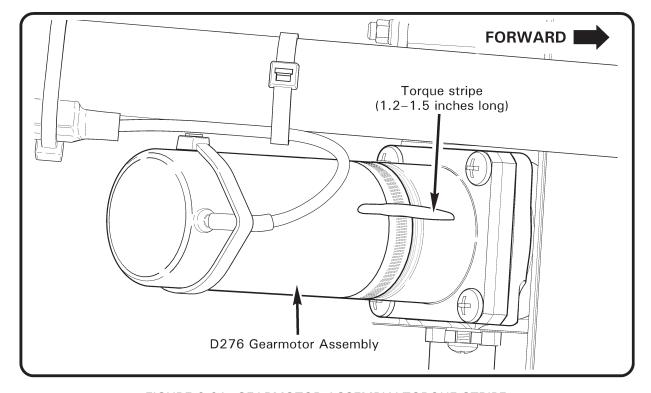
A GEARMOTOR ASSEMBLY TORQUE STRIPE
